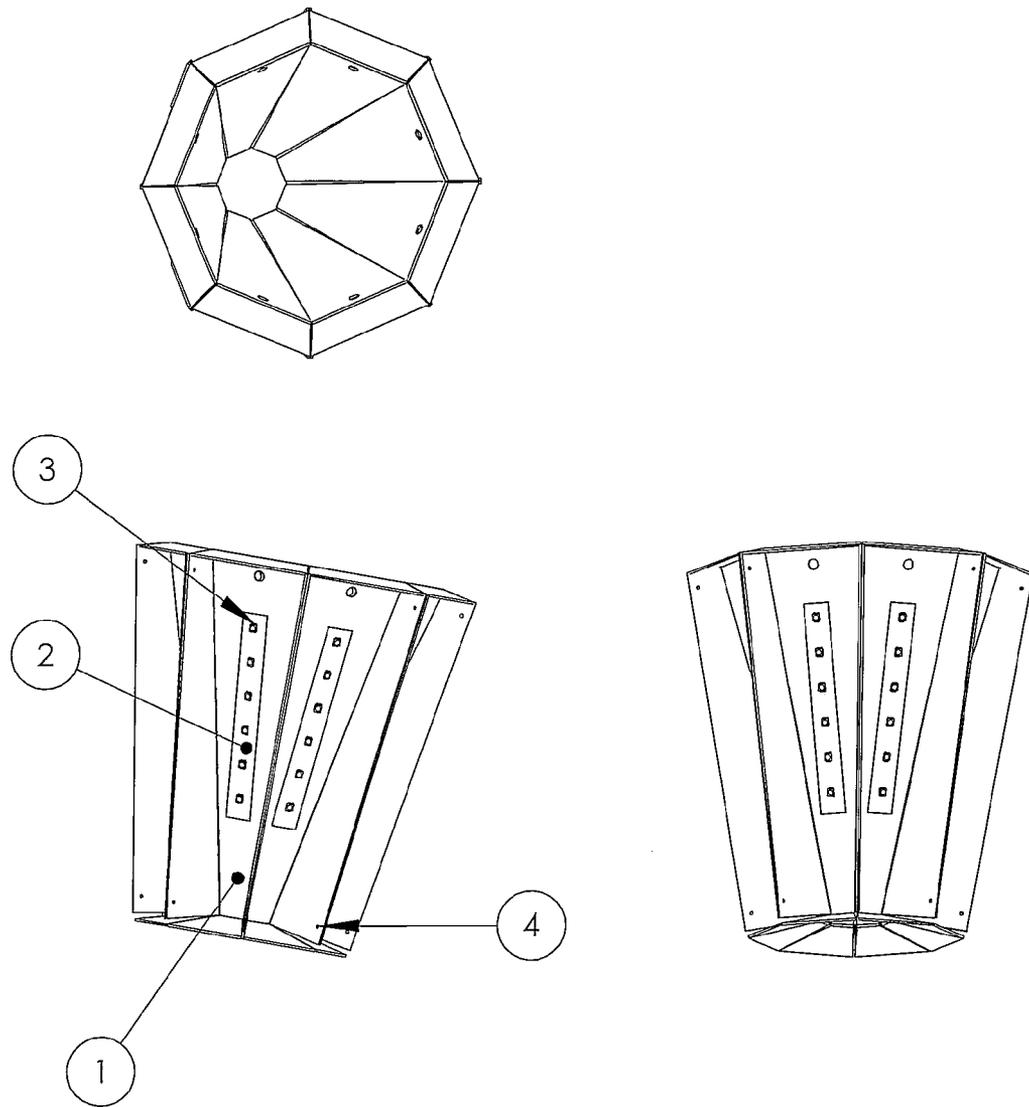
8-sided Led Fixture Assembly 16.7 degree tilt
